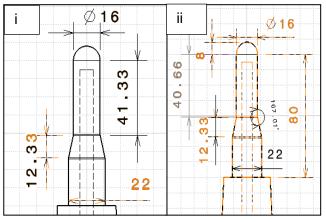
shows the existing mould that was used to fabricate 25g PET preform (parisan). For the 15g PET preform, the outer dimension of insert is still the same as the existing insert (25g PET preform). The only dimension that has been changed was the size of mould diameter of the preform in the insert cavity. The diameters at the neck of preform were both 25mm, but the length of preform cavity was modified from 70mm to 69.2mm. It can be seen that when the size of preform was changed, the design of the mould was also changed as well as the shape of the preform cavity. The existing cavity has constant diameter from neck to bottom, however for 15g preform cavity, the diameter at the neck was 25mm,
